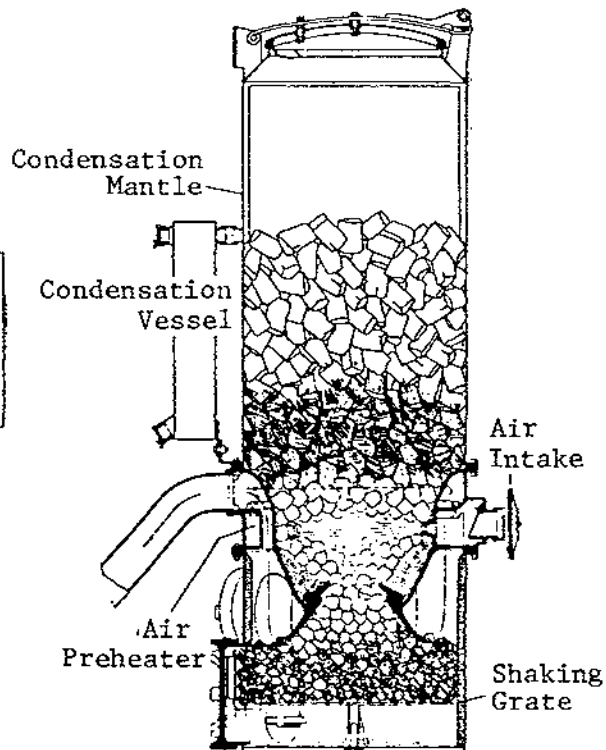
Wood Gas Generator for Boats, Swedish Generator Gas Co. (with air intake and the other part of the hearth cast in one piece of ordinary iron with a removable hearth ring)
